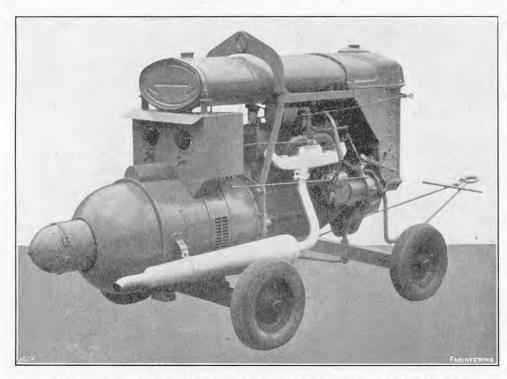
Petrol-Engine Welding Set; Lincoln Electric Company, Limited.
